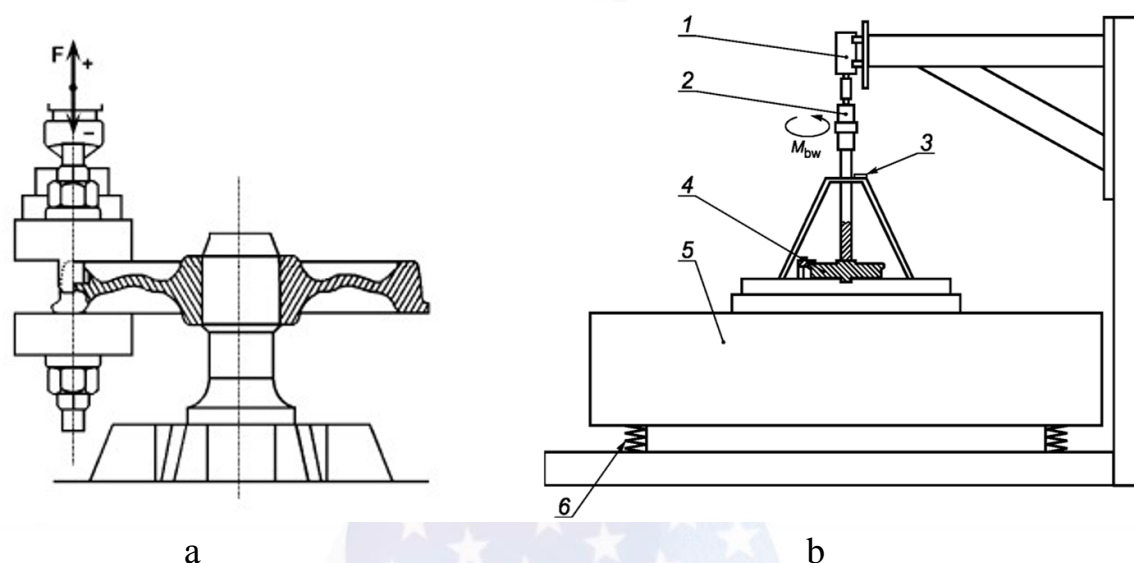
Schemes of testing wheels for fatigue: a - bending; b - bending with rotation
